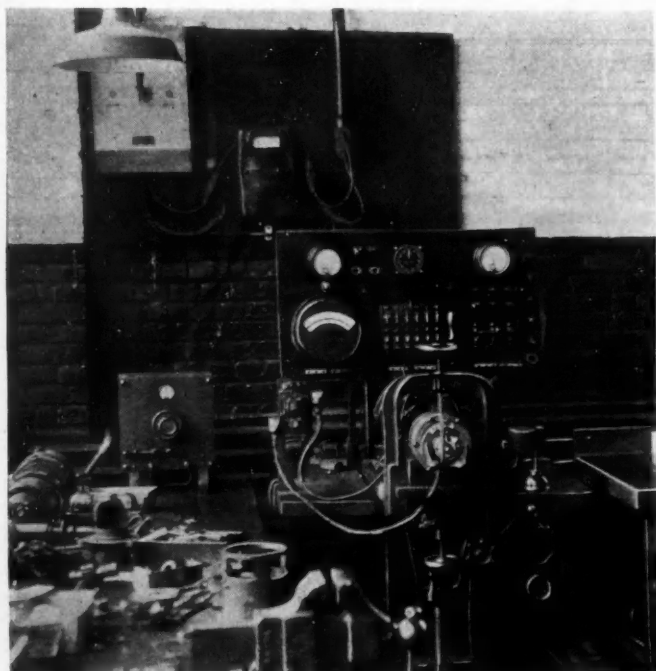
ELECTRICAL SECTION OF THE MACHINE-SHOP
